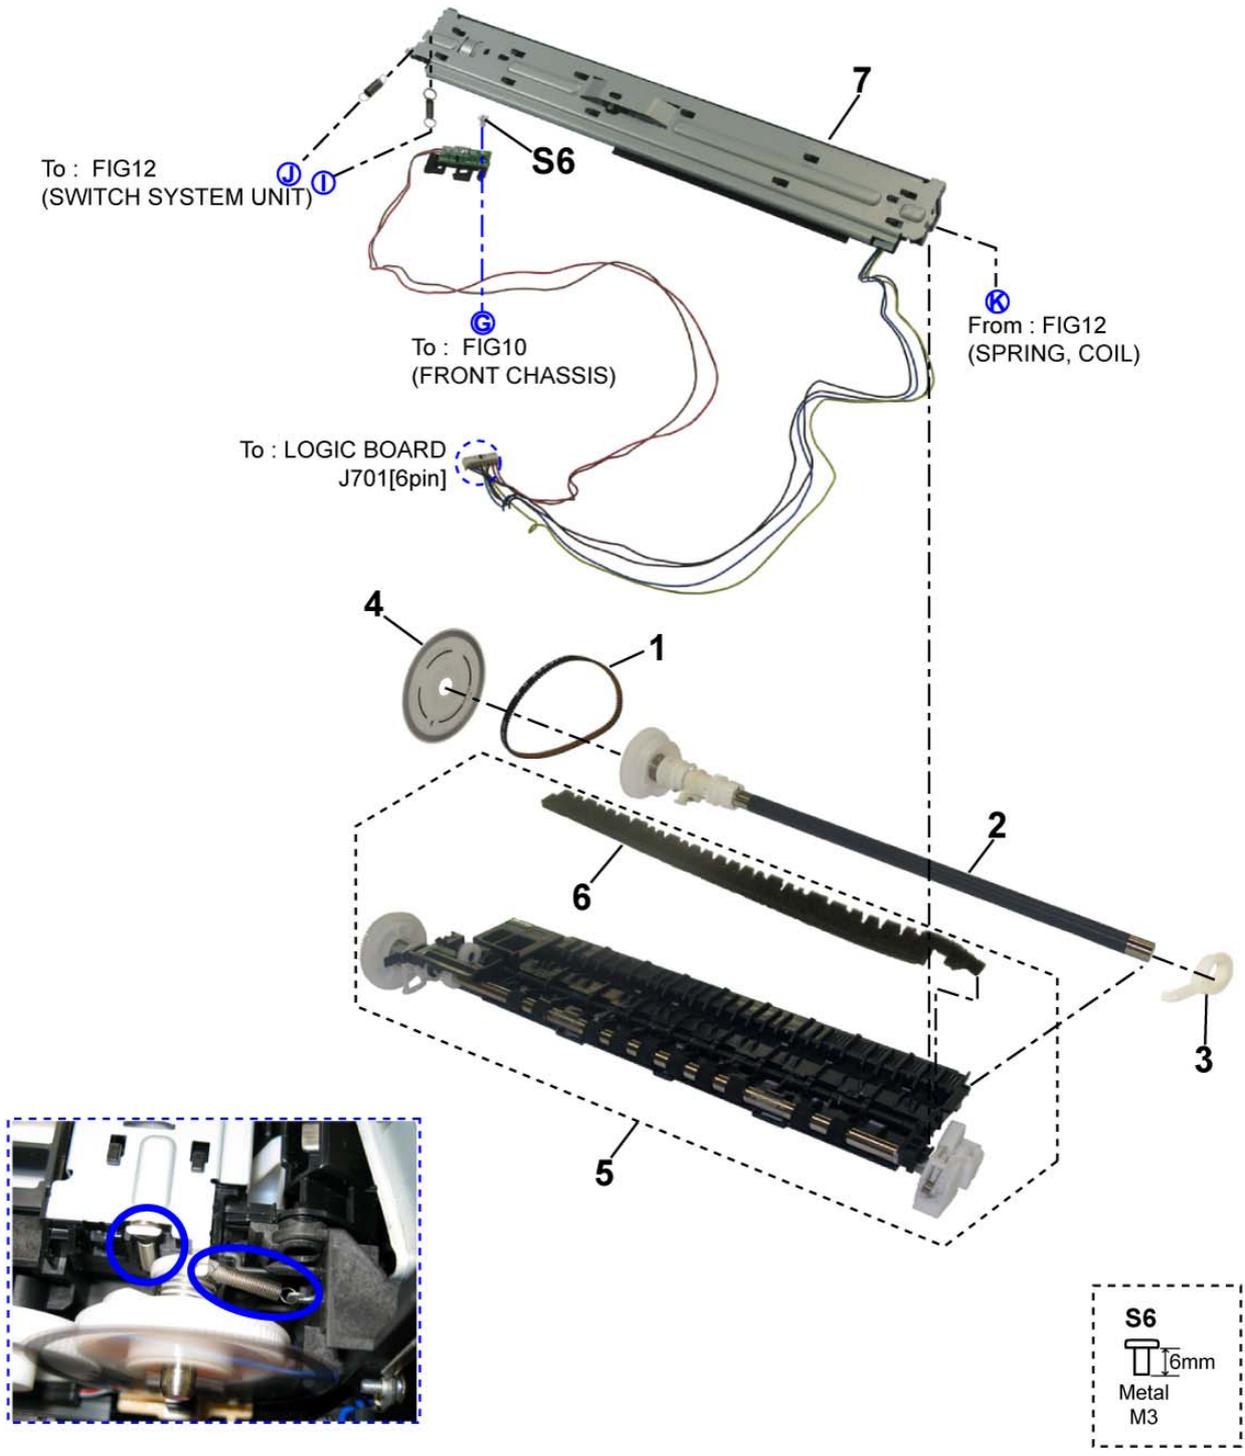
CARRIAGE UNIT & PRESSURE ROLLER UNIT
